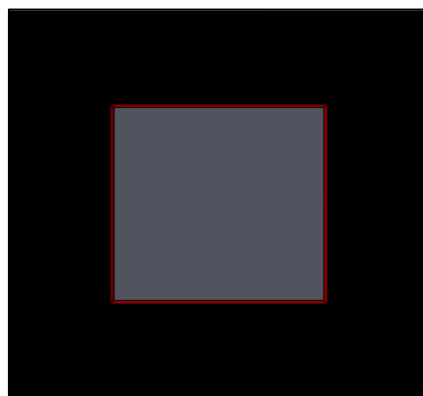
2D Image Shows the Welding Around Square.
